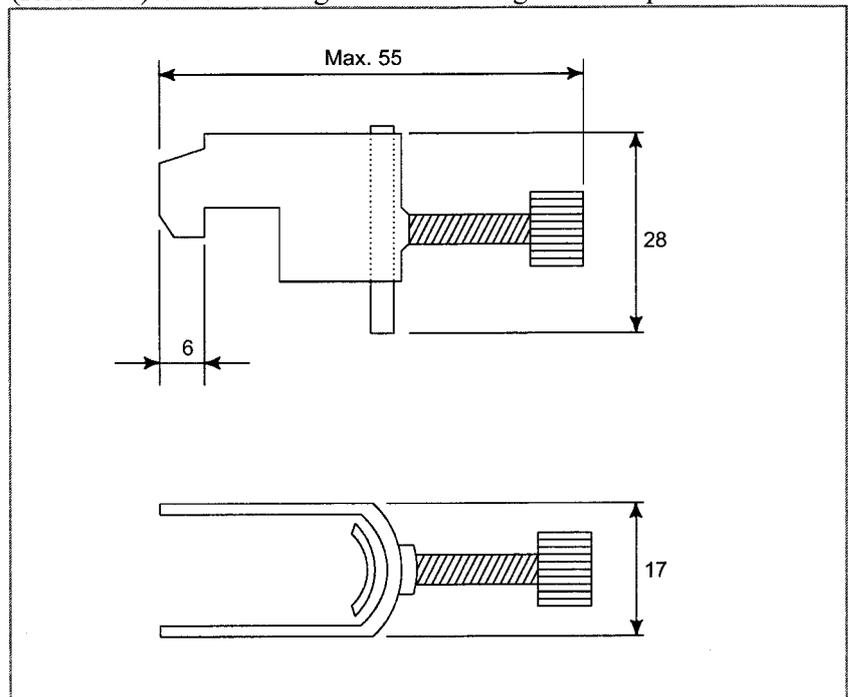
(e) Outer drawings of metal fittings for clamp
